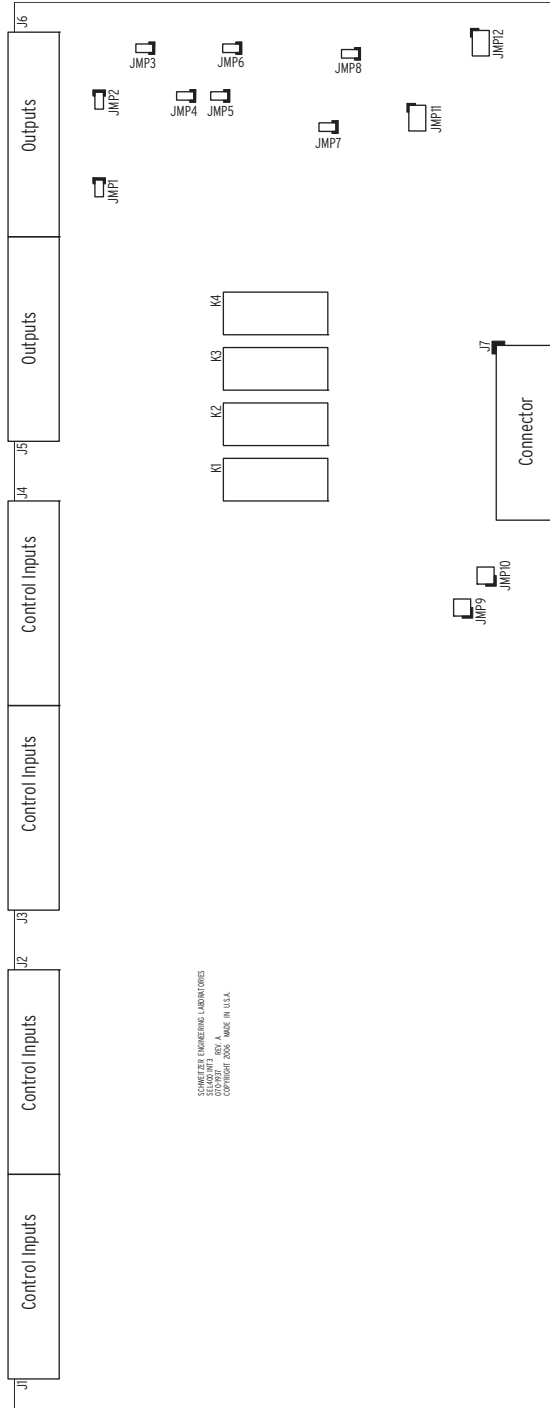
Major Component Locations on the SEL-421 INT3 I/O Board
